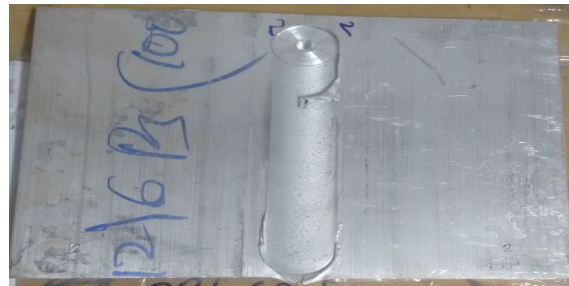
Friction stir welded joints 2, 4 and 6.
